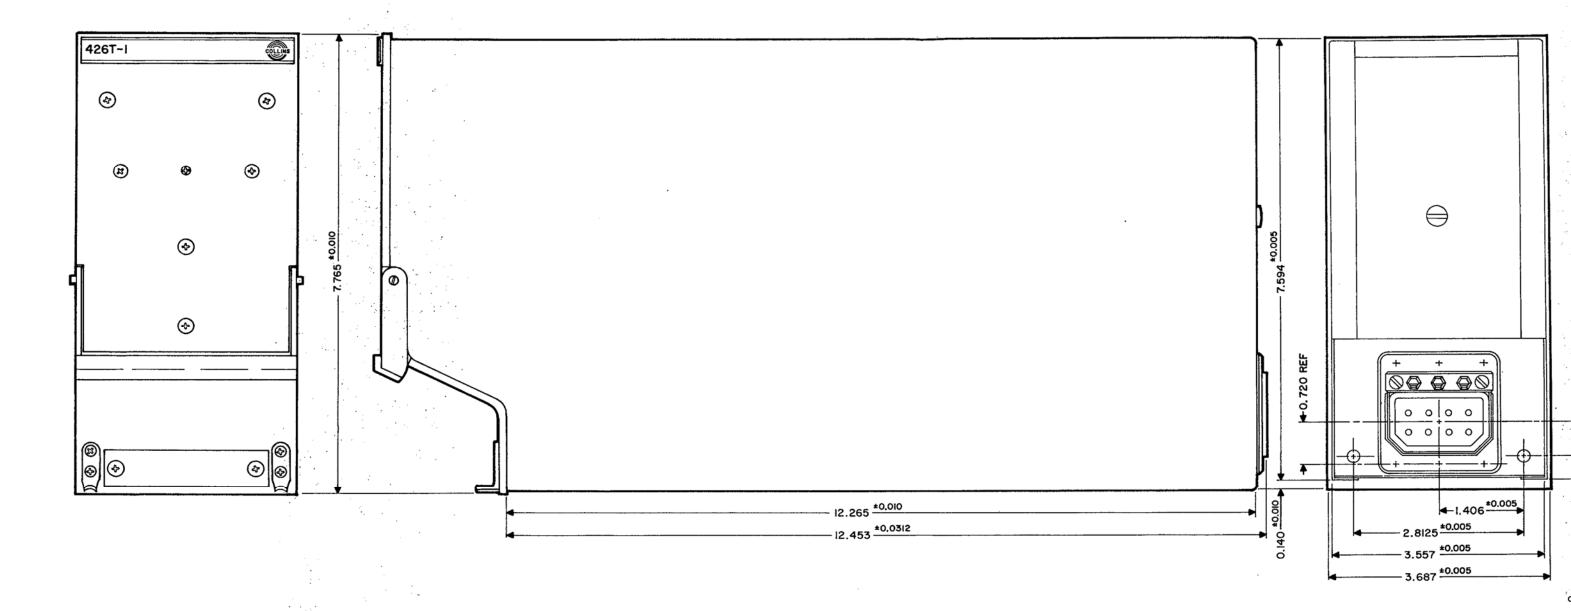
426T-1 Power Inverter, Outline and Mounting Drawing.
